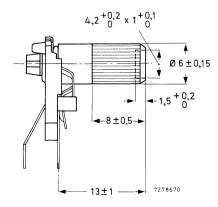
Test switch for vertical mounting with adjustment knob at the side of the selector contact.
